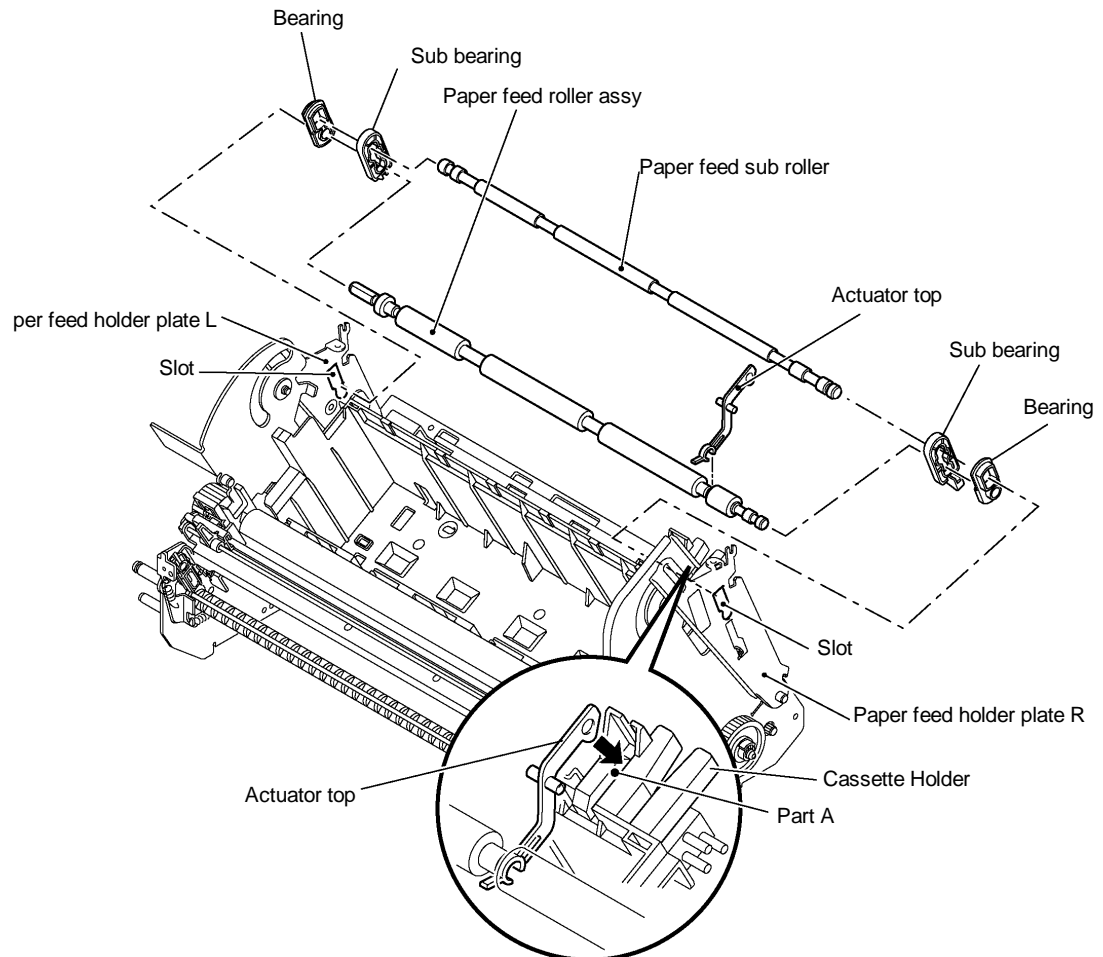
Installing the Paper Feed Roller Assy 1
